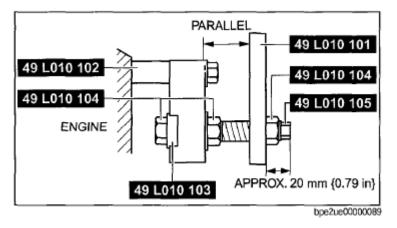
Identifying Engine Mount Nuts, Bolts, Plate And Arms
